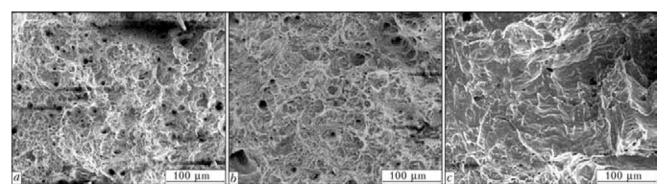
Fractograms of fracture surfaces of specimens cut out in radial (*a*) and tangential (*b*) directions after static (short-time) tensile and impact bend tests (*c*)
